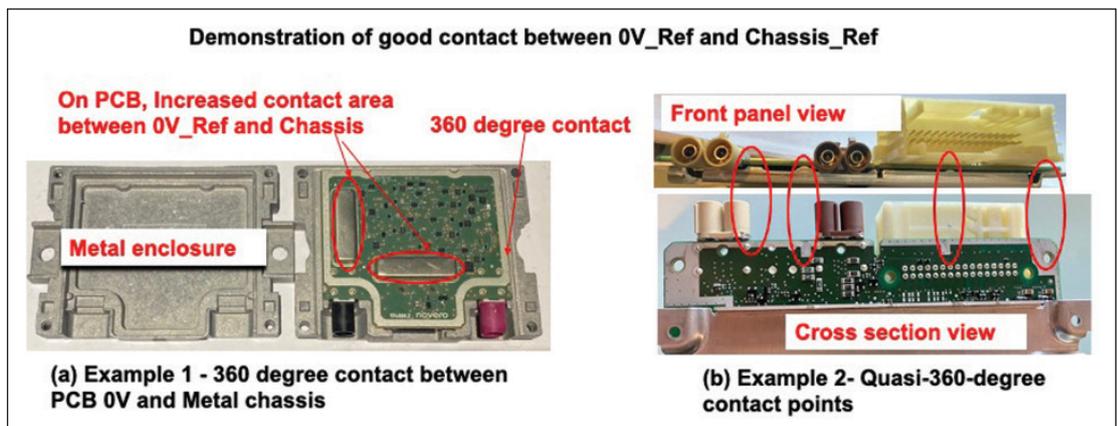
Demonstration of good contact between PCB 0V ref and chassis reference to reduce inductance
